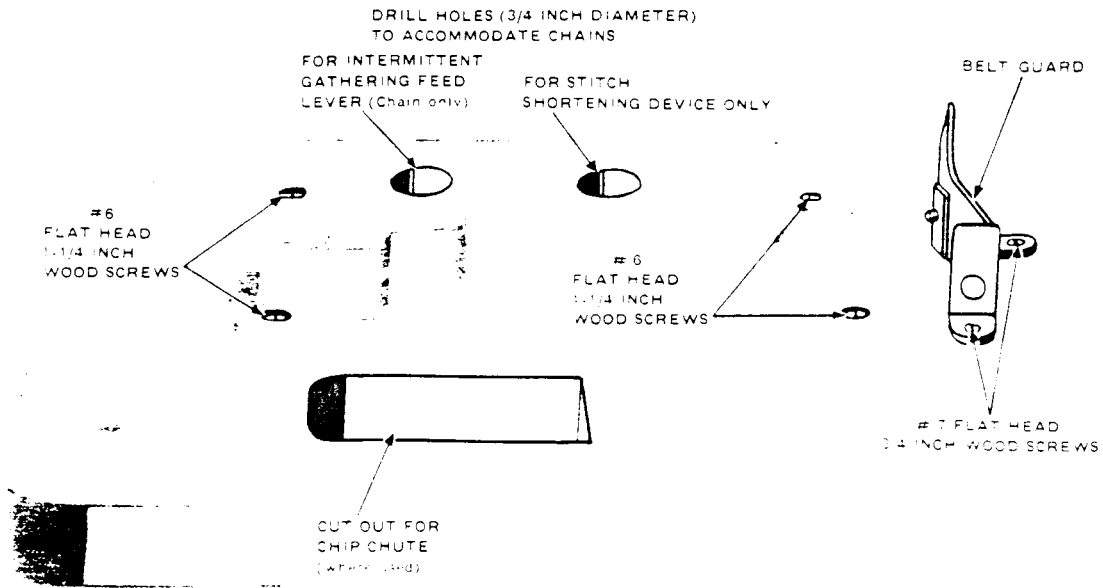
Machine Cutout, Showing Position and Drill Sizes of Holes Required for Installation.
